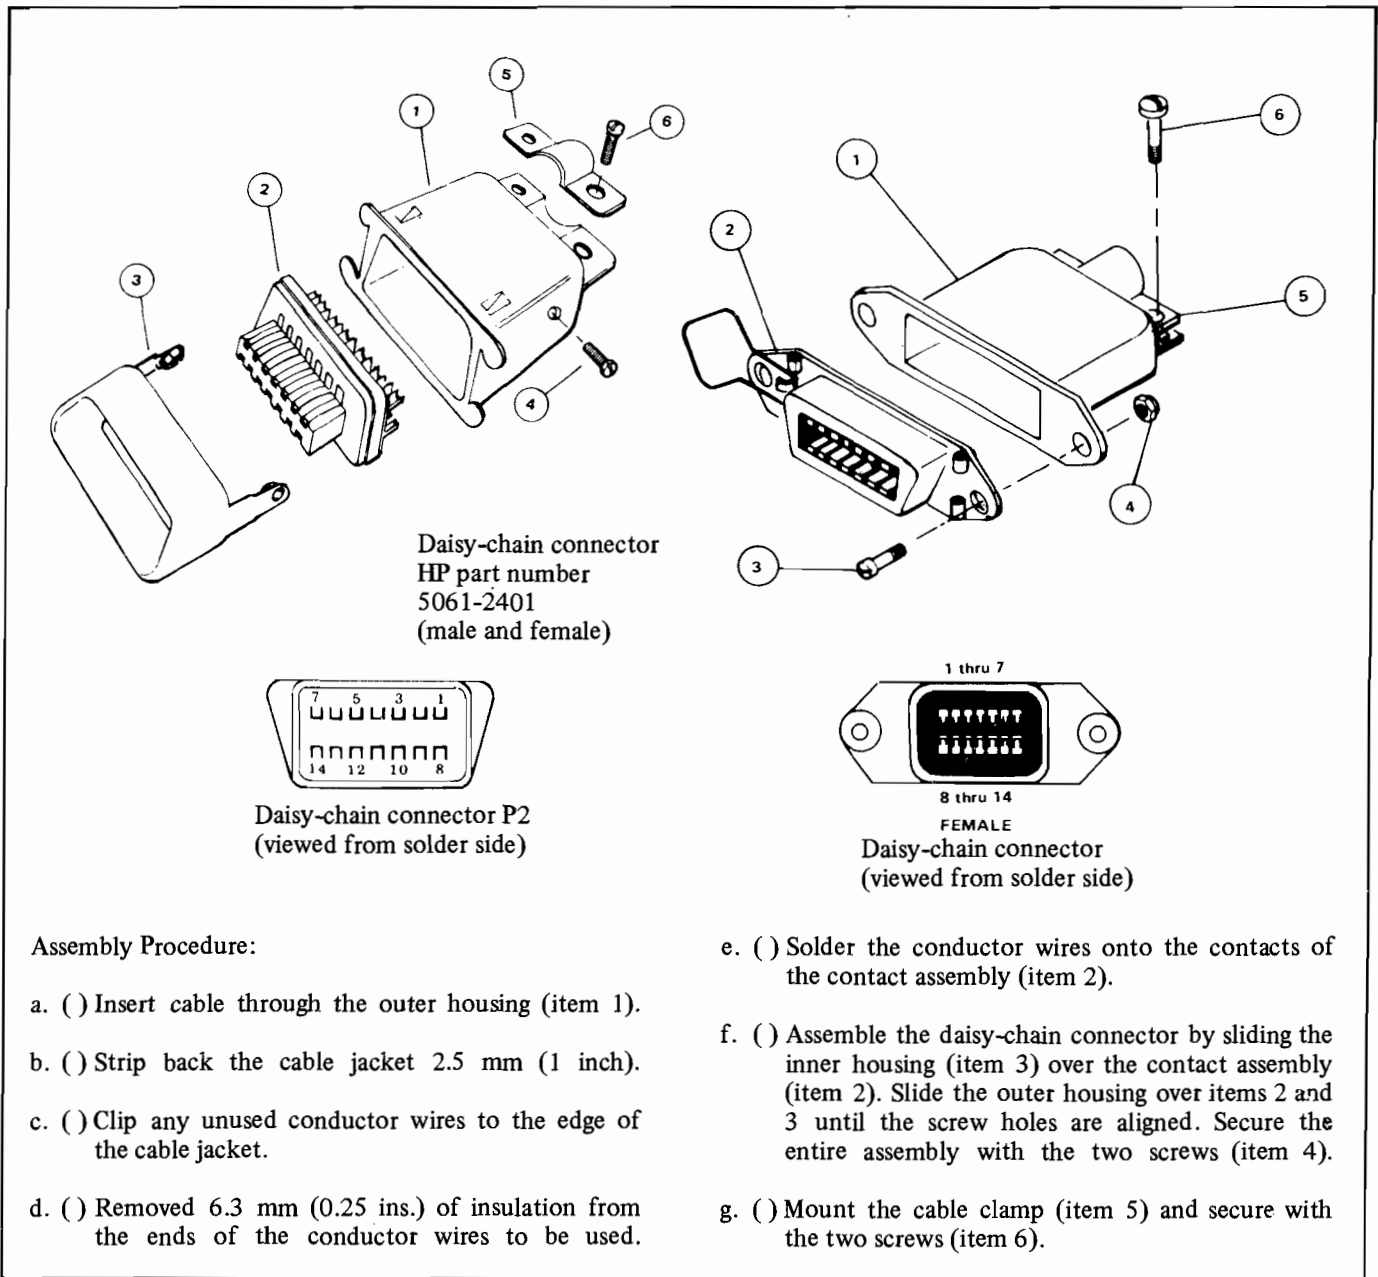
Assembling The Daisy-Chain Male And Female Connector
